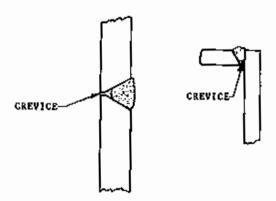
CREVICES IN WELDS WITH INCOMPLETE PENETRATION
